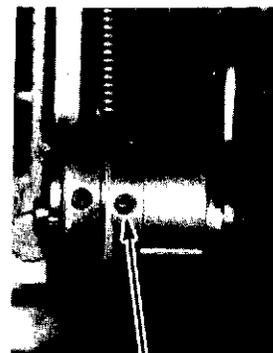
CLAW ARM ADJUSTING SCREWS
